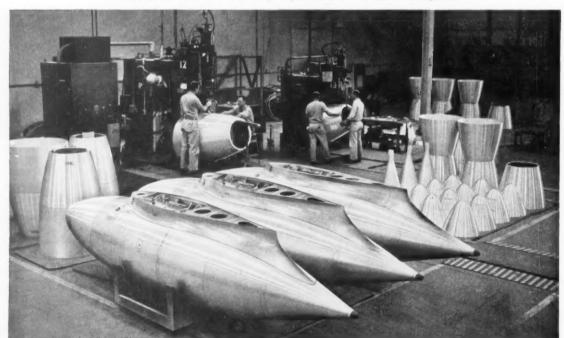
Three completed wing-tank assemblies, with various sections. Circumferential welding of the sections to splice rings is performed on machines in background.
